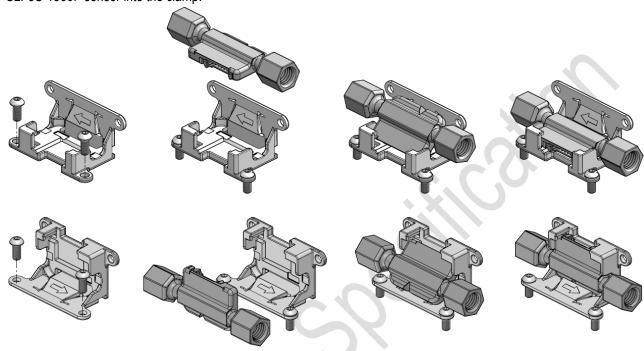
Guidelines for mounting of the SLF3S-1300F sensor inside the SLF3x mounting clamp
